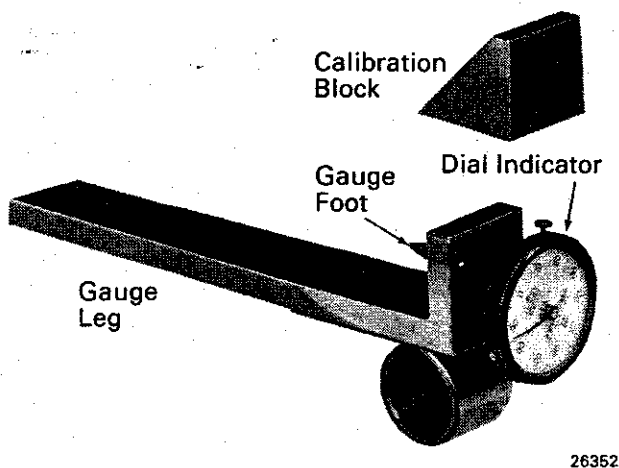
Head Retainer Wear Step Gauge, Shown With Dial Indicator (Not Included)
